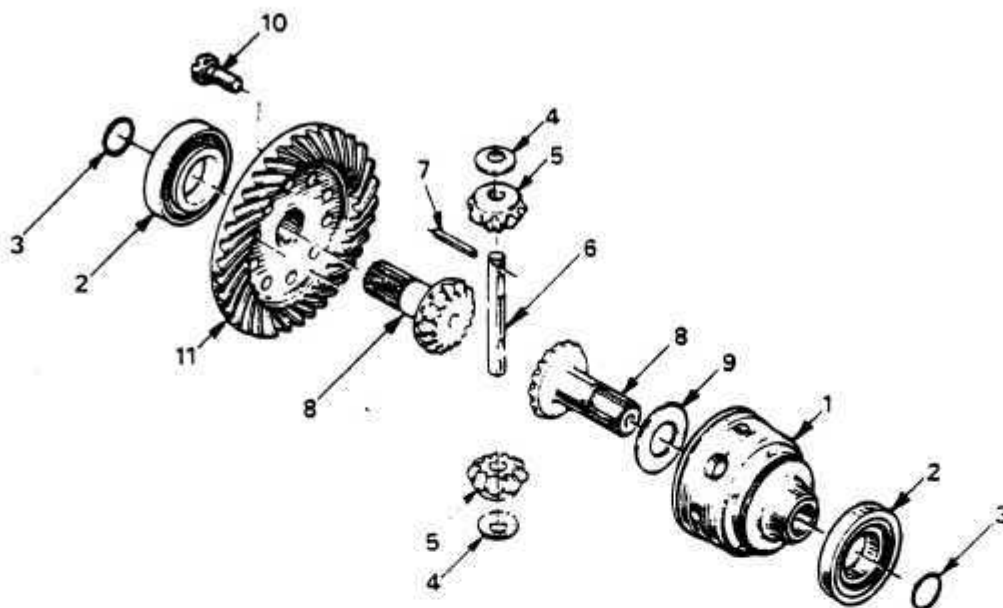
FINAL DRIVE ASSEMBLY EXPLODED
